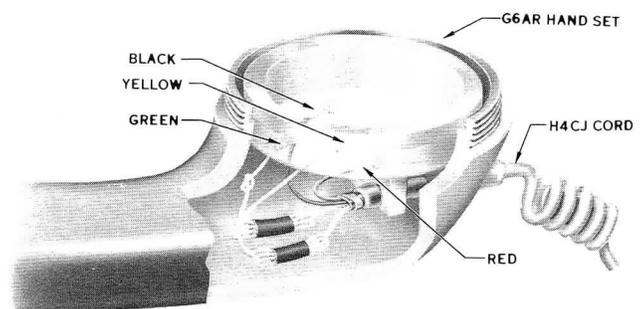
G6AR, G7AR, and G8A Hand Sets, Cord Mounting
